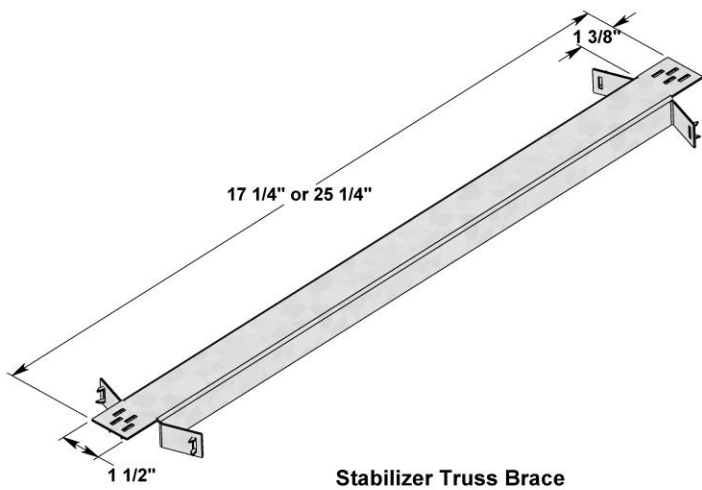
STABILIZER™ TRUSS BRACE AND TYPICAL INSTALLATIONS
